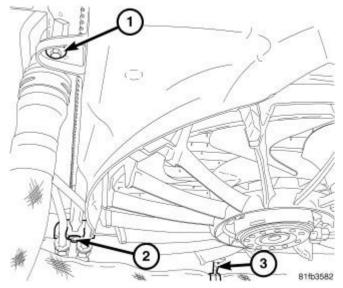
Radiator Fastener, Transmission Cooling Line Retainer Bolt & Radiator Hose Retainer Courtesy of CHRYSLER LLC
